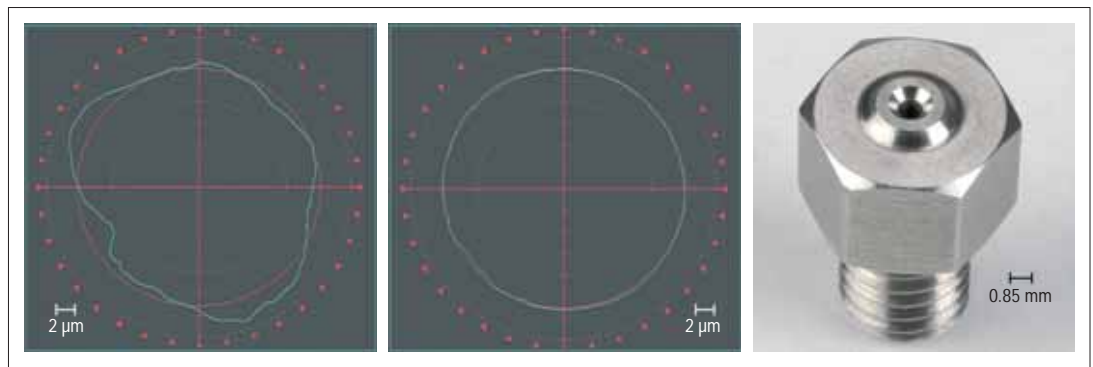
Roundness measurement of a nozzle with a 0.85 mm bore before and after machining by MBS
